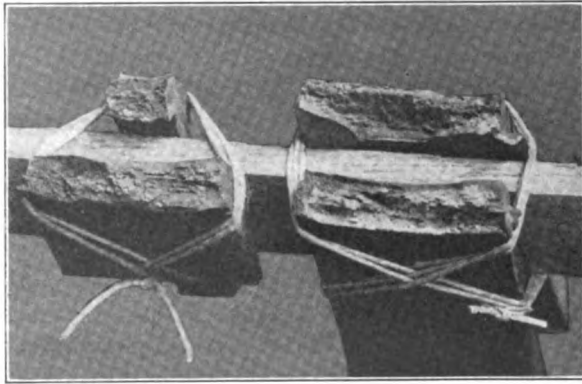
LAMELLAR APPEARANCE OF METAL, SHEET C, FRACTURED BY BENDING WHILE AT A BLUE HEAT
